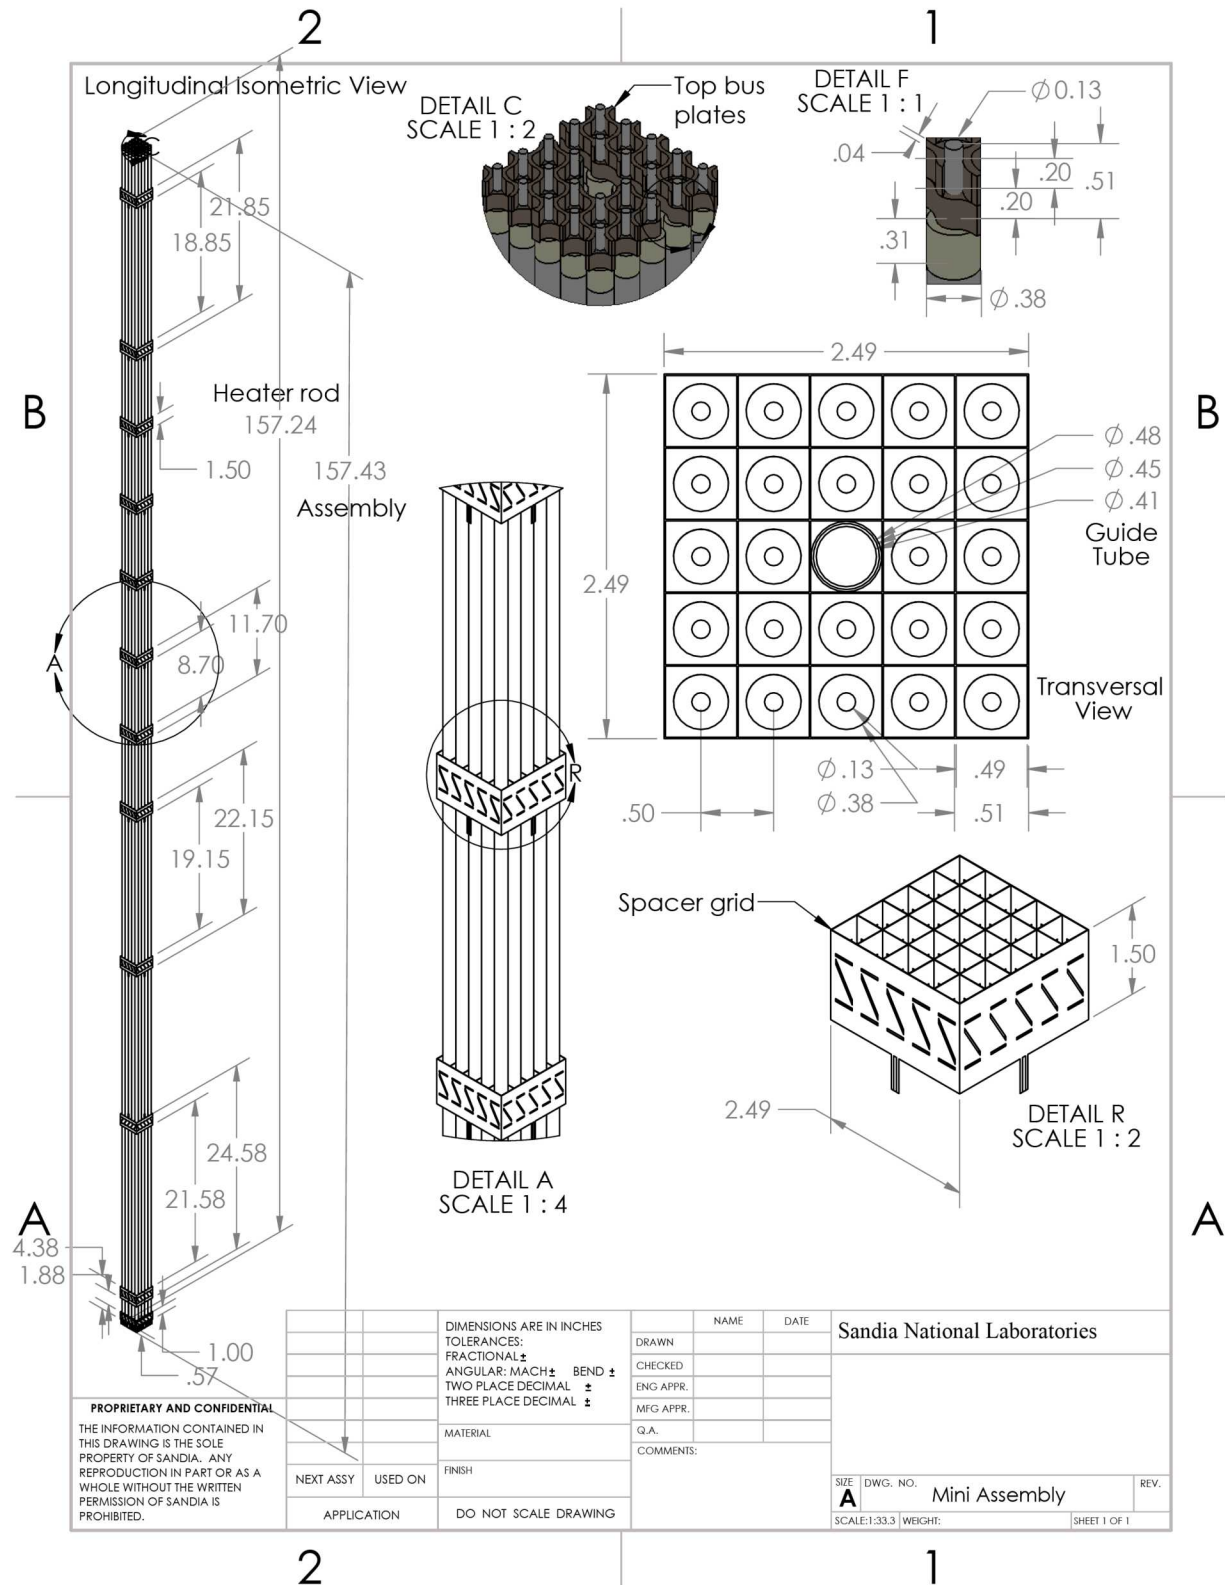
Schematic of truncated PWR assembly (dimensions in inches)
